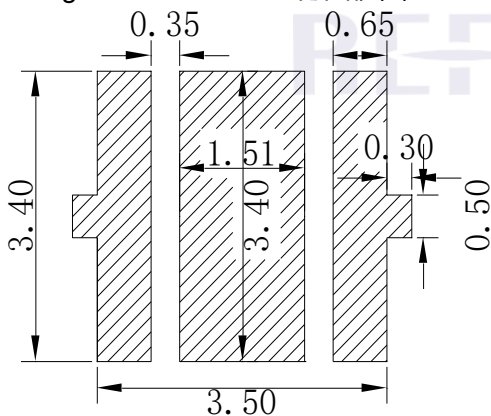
Soldering patterns 推荐焊盘
